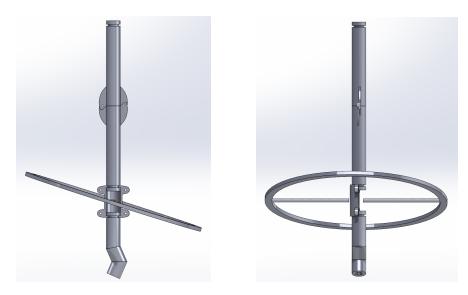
CAD of our first prototype, which used a ring to handle the lunar position
